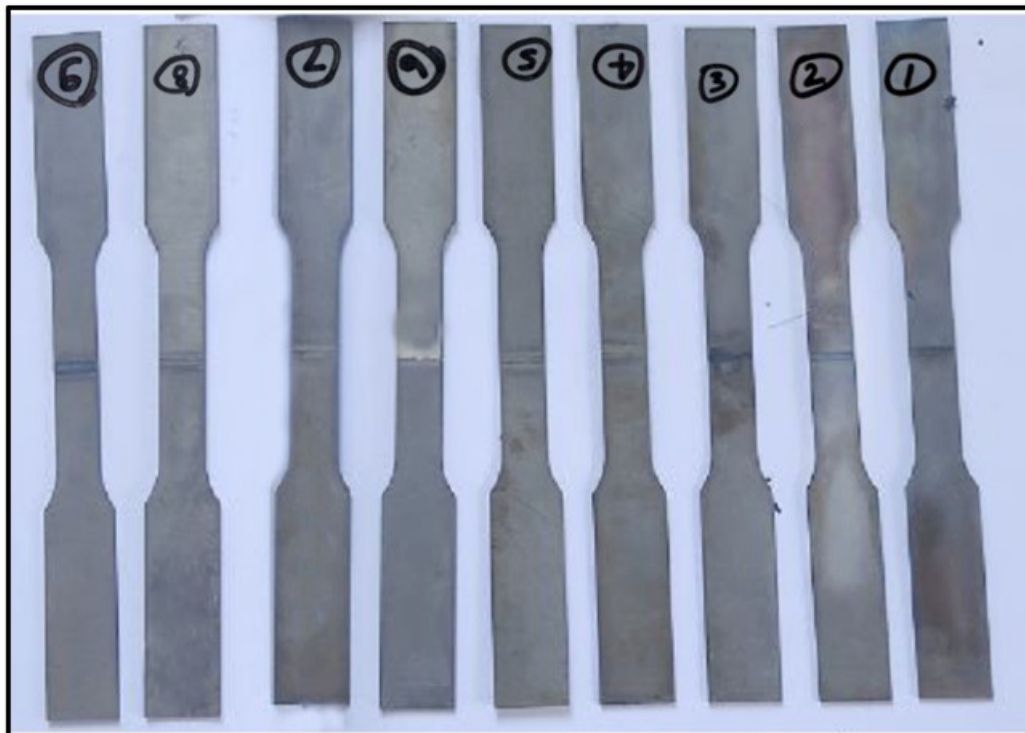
Laser welded tensile joints (set of L_9).
